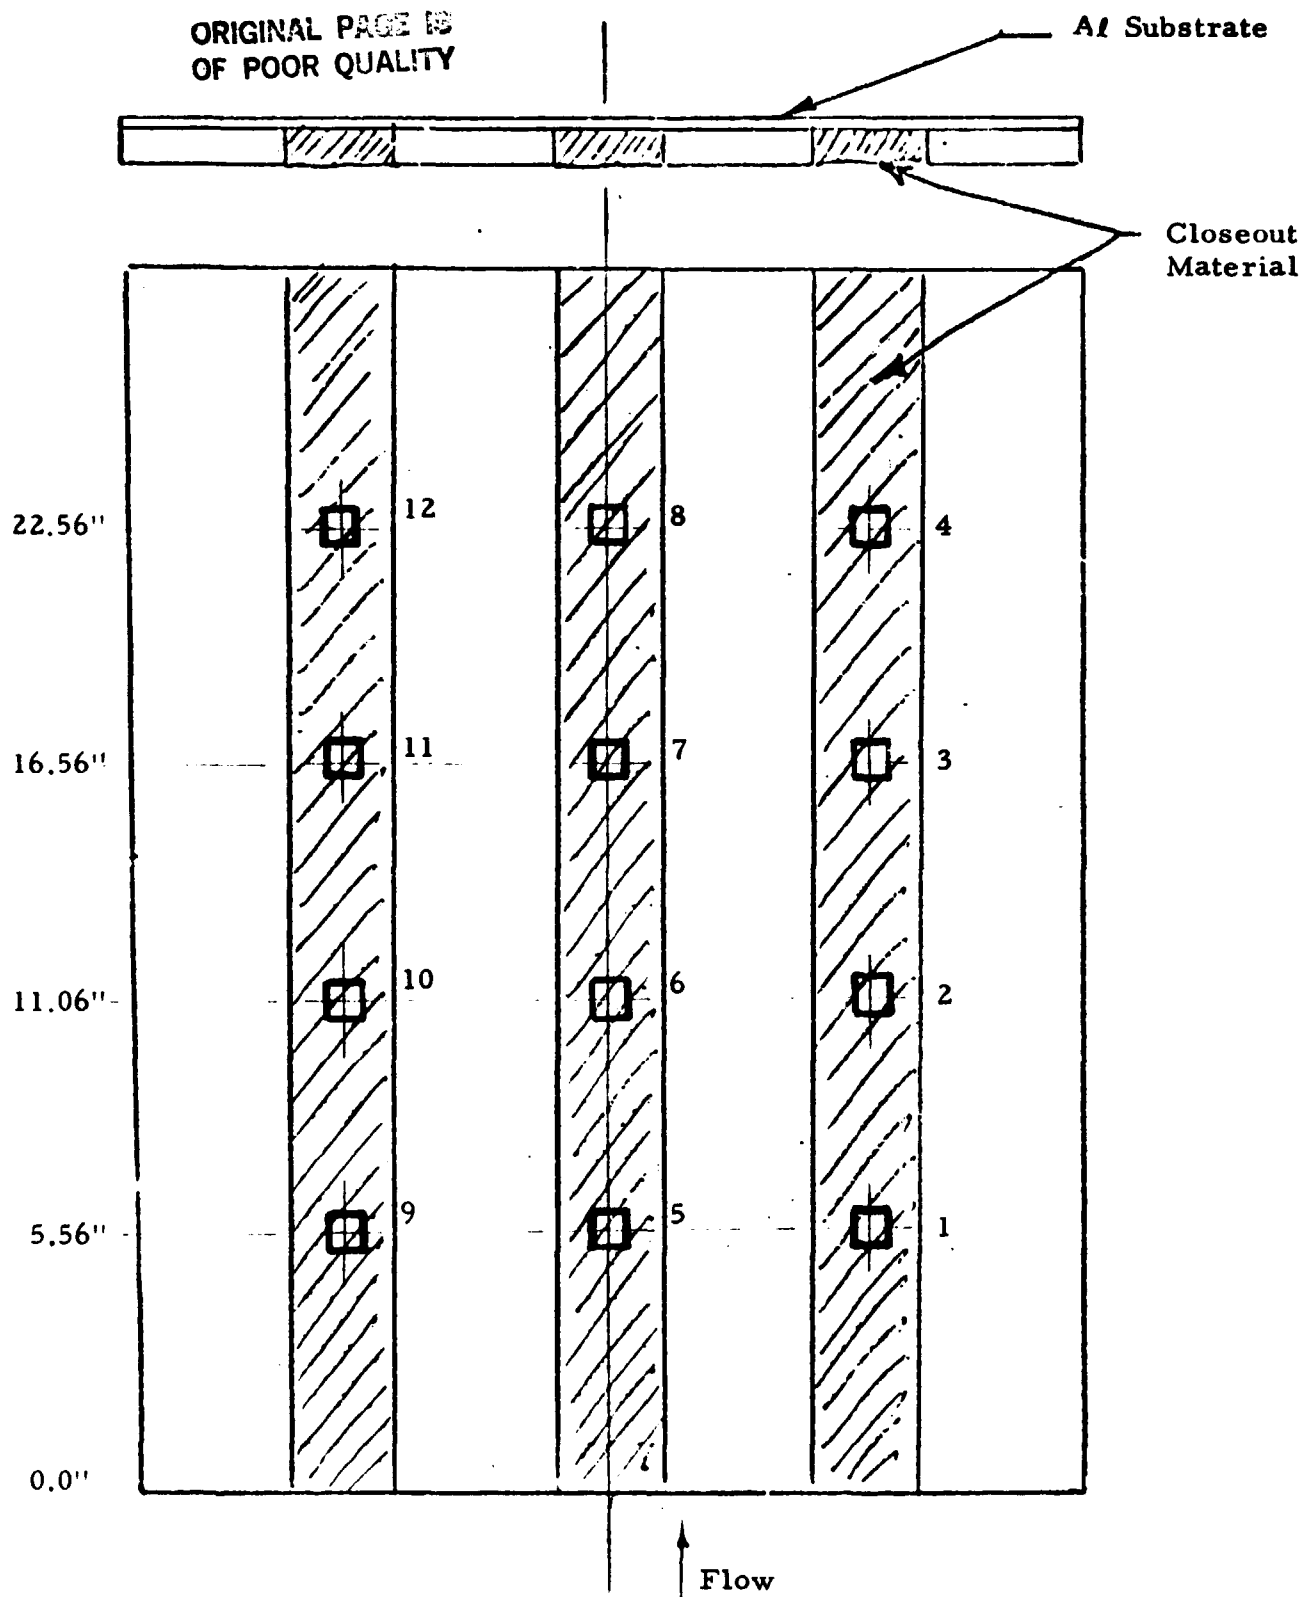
Sketch of the Test Panel Showing the Twelve Pretest and Post-Test Measurement Point Locations on the Closeout Material
